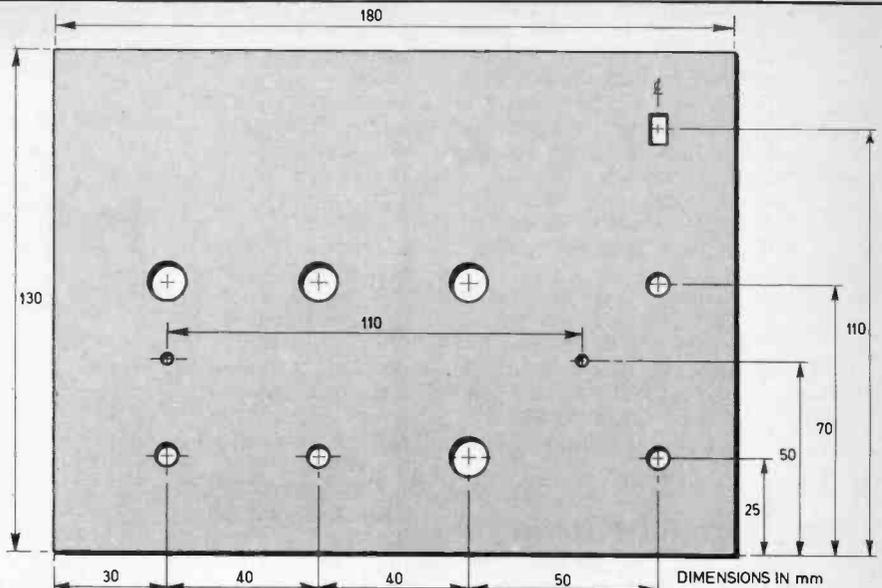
Drilling details for the front panel. Final size of holes will depend on components used.
